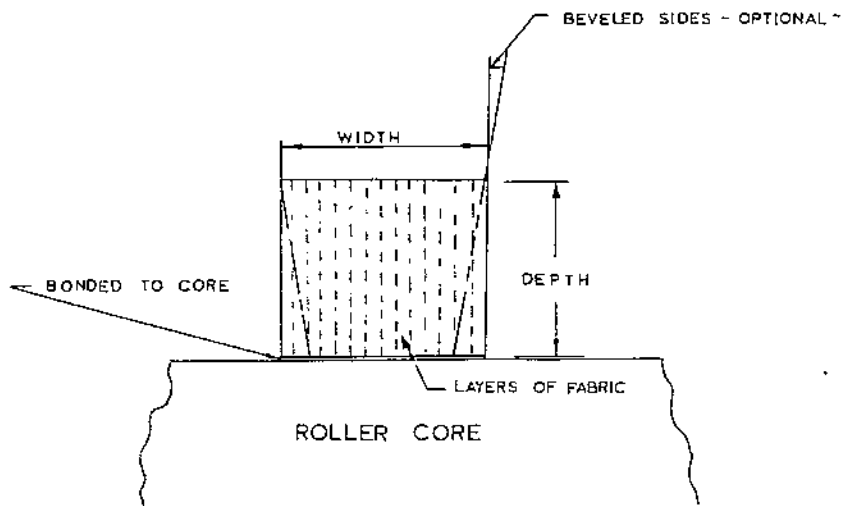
Cross section of packing-type roller covering material made ready for bonding to roller core.
